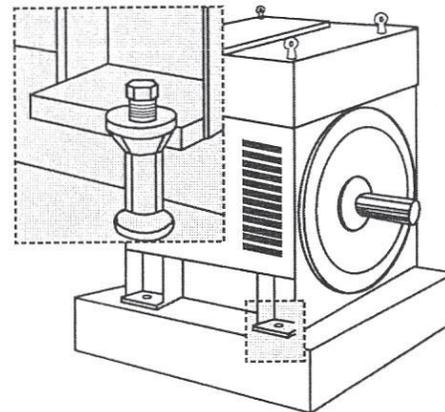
Motor mounted on a concrete base with foundation studs.
